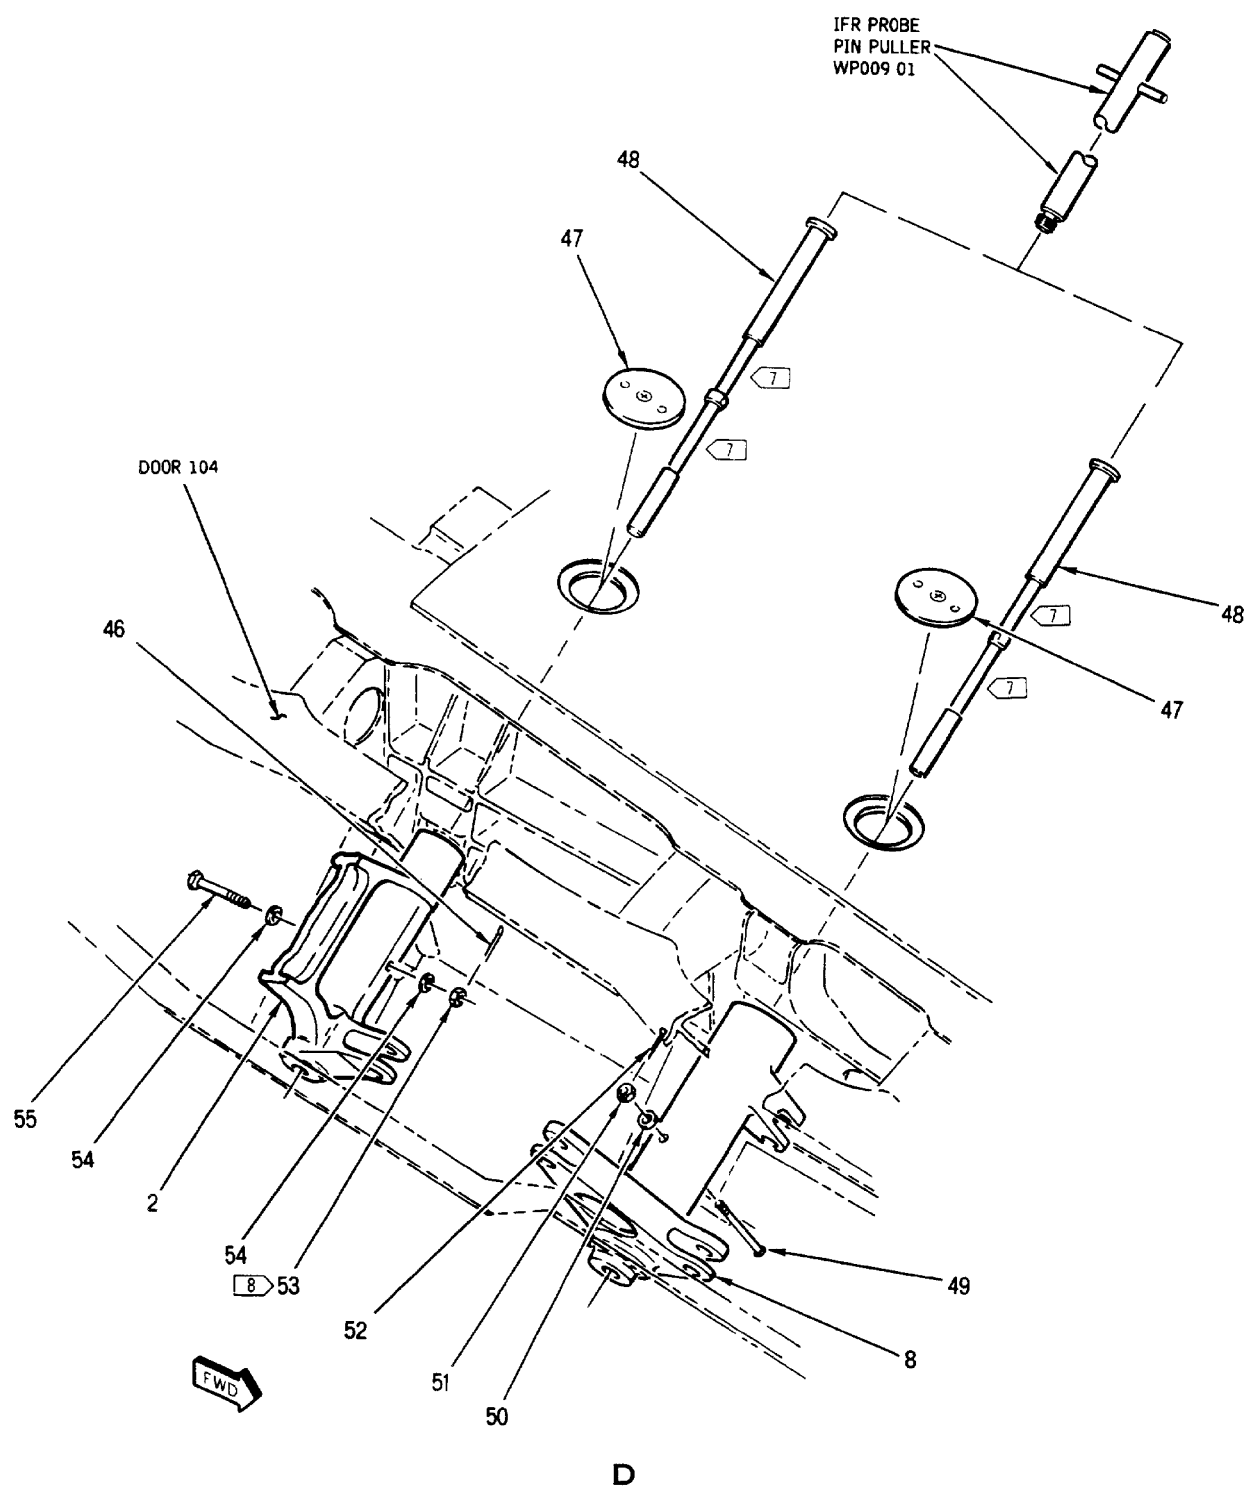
Inflight Refueling Probe and Door Drive Mechanism (Sheet 6)
